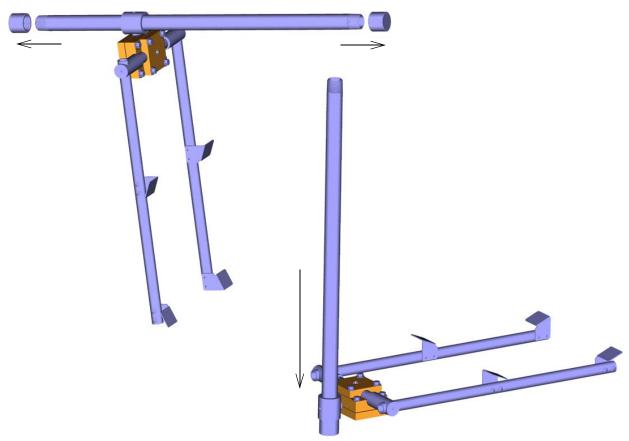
Temp Mount: Install sensor carrier/knuckle onto 24" pipe
